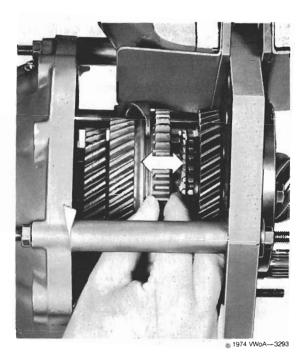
Operating sleeve being moved. 2nd gear is at the right end of the double-ended arrow.
